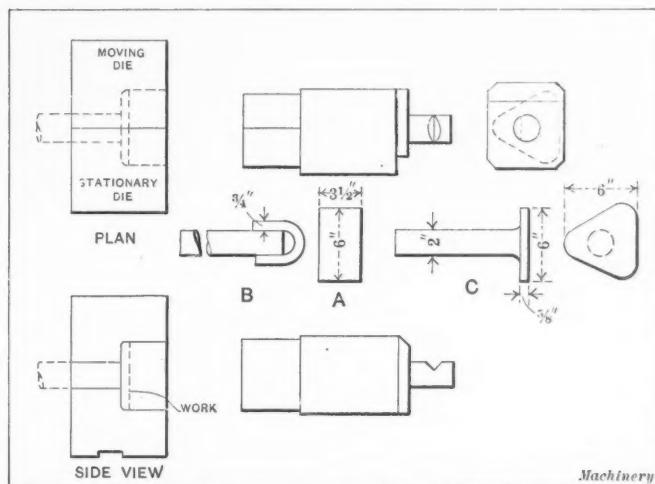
Forging Machine Dies and Tools for making a Car Float Stanchion Foot
